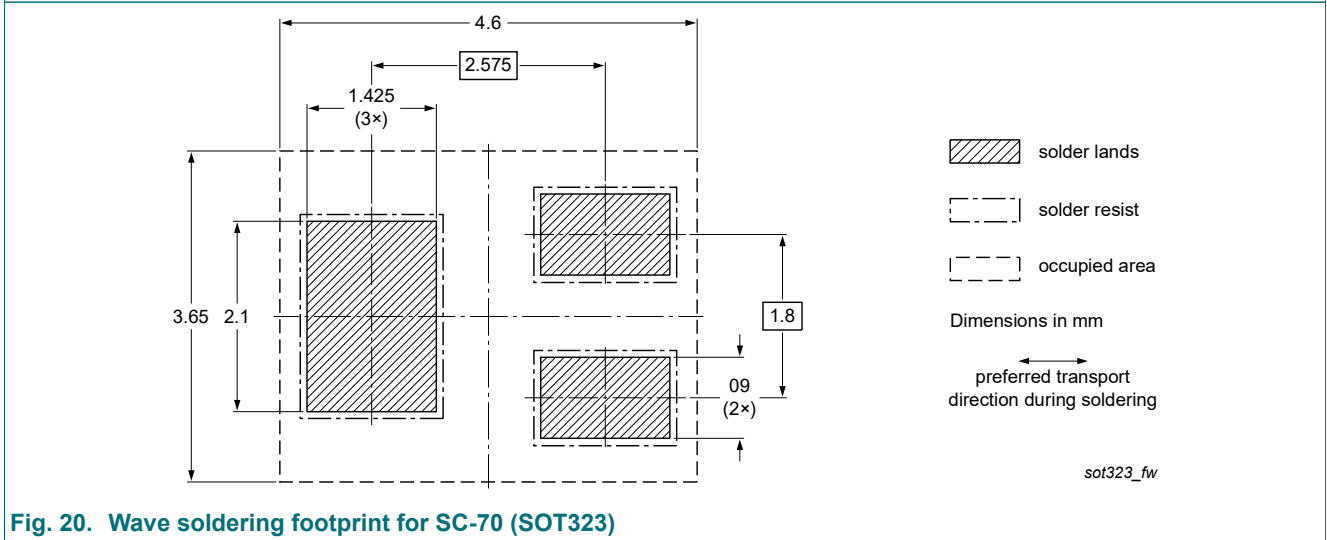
Wave soldering footprint for SC-70 (SOT323)
